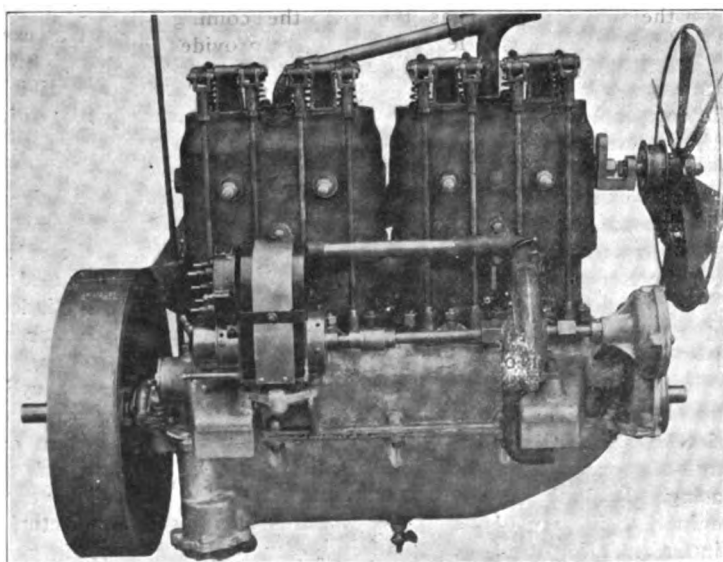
OVERHEAD VALVES WITH SINGLE CAM SHAFT—THE PARRY
